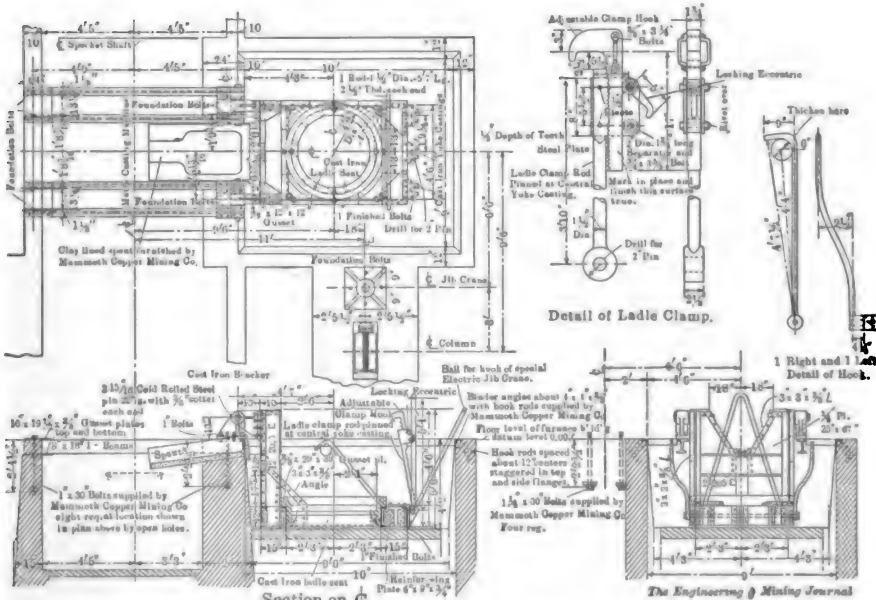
MATTE-POURING CRANE AND CRADLE AT MAMMOTH SMELTER.
